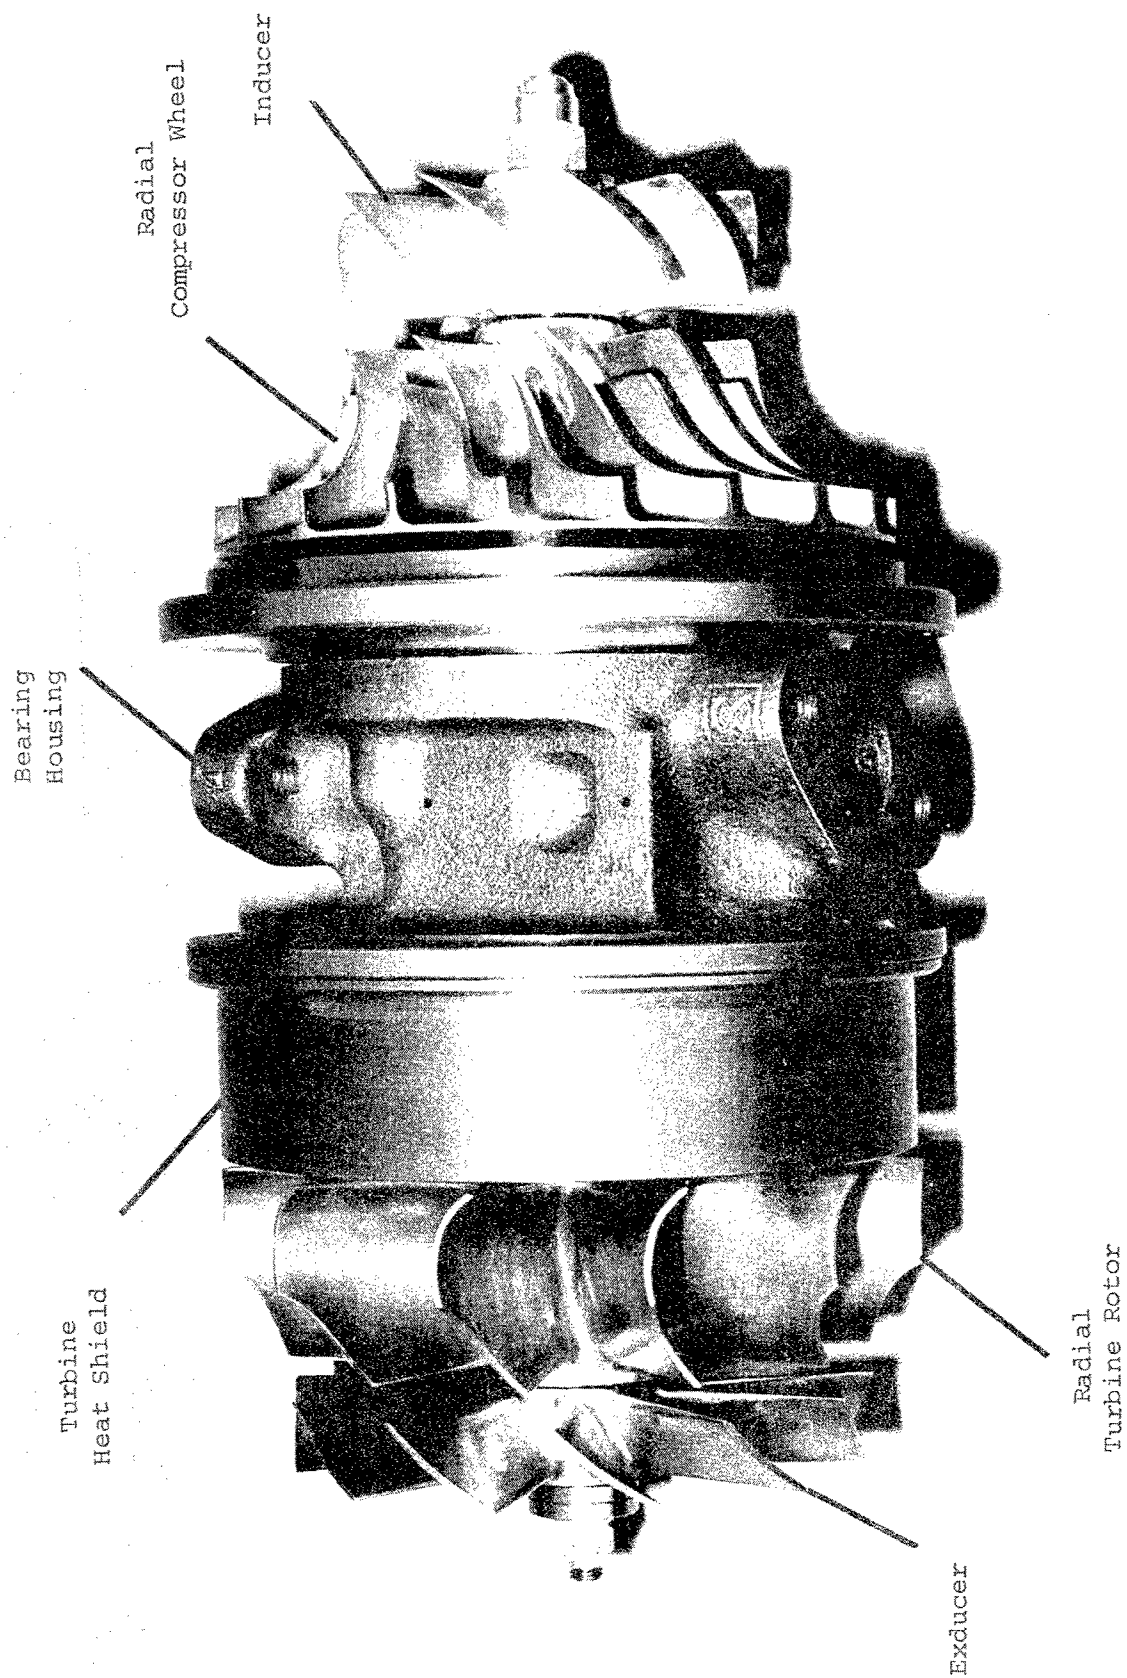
Photograph of assembled twin-spool turbocharger rotating assembly
